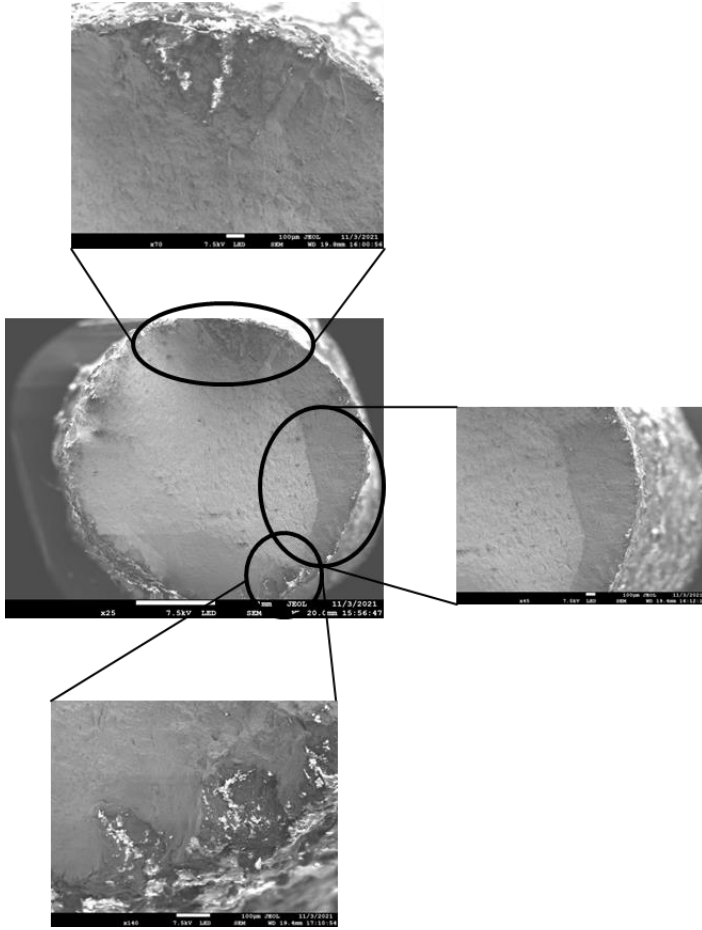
Fractography of fatigue sample 1 fabricated with 280 W.
